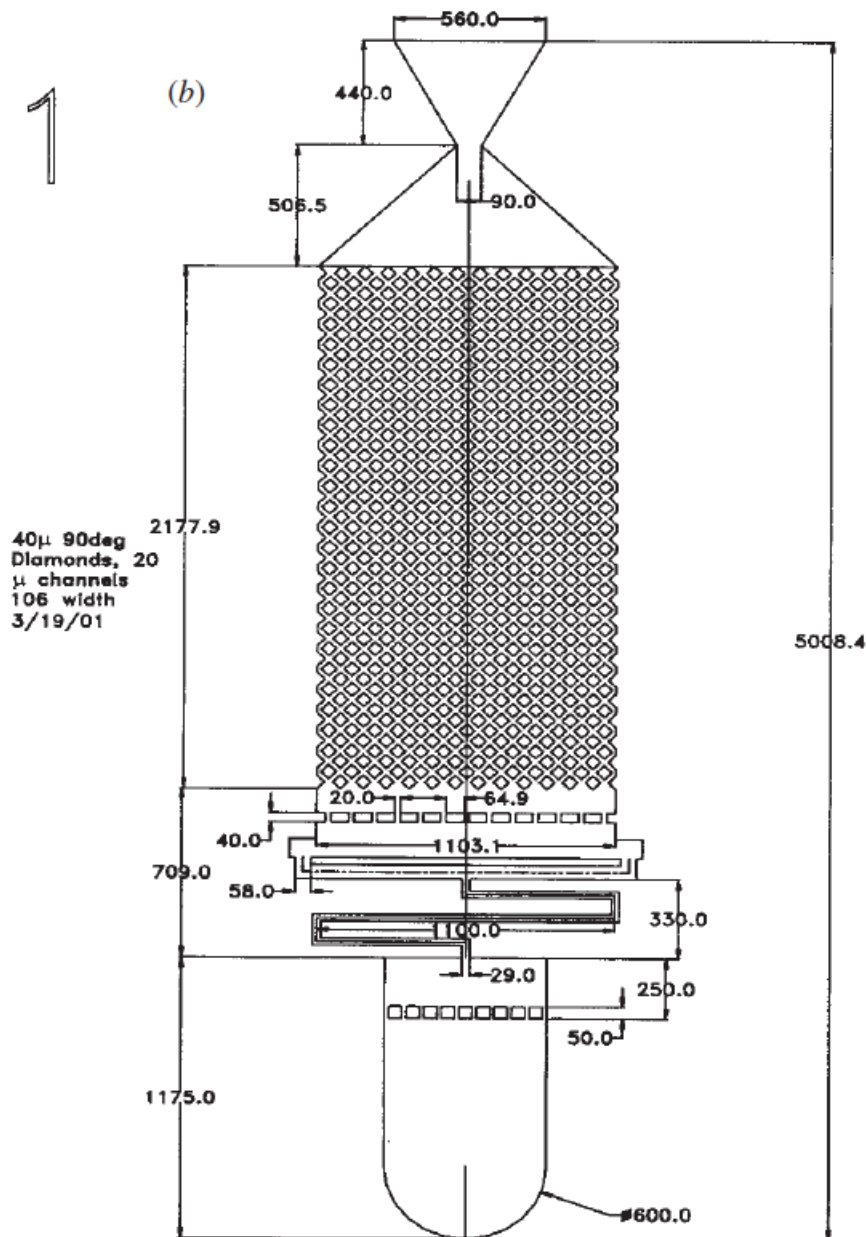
Mechanical drawing showing top view of the microthruster design geometry
